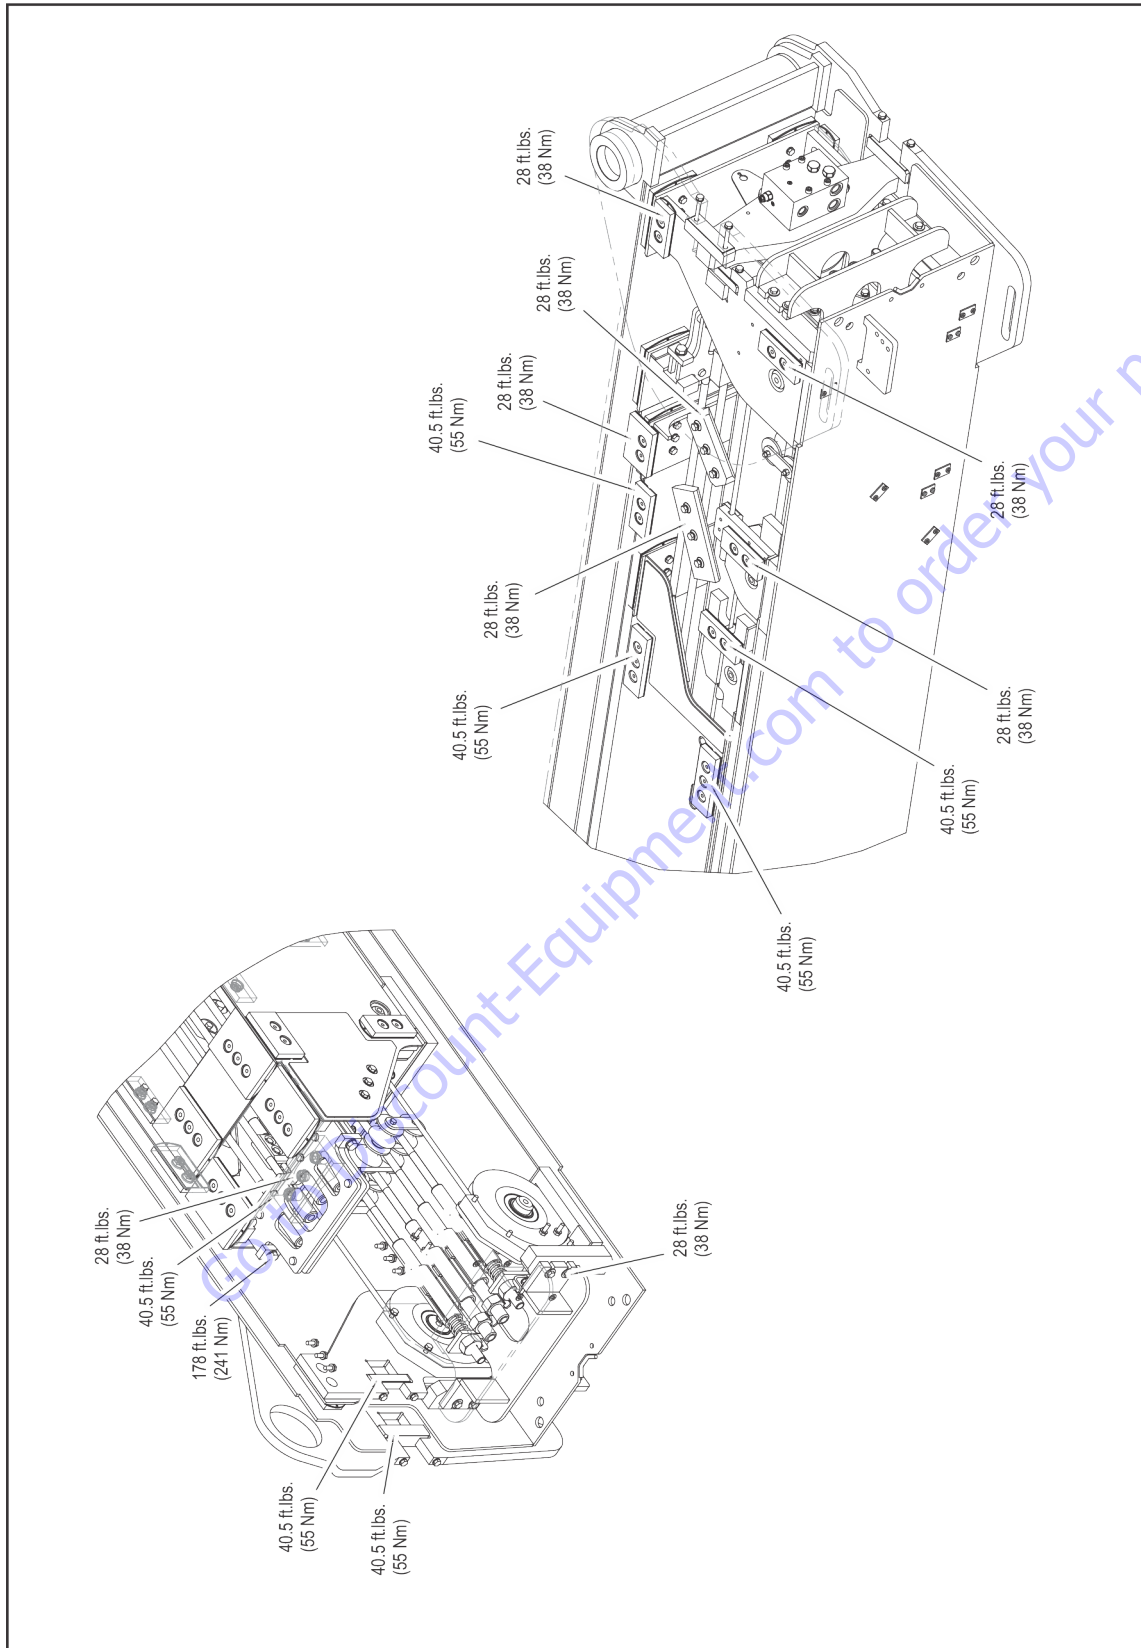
Boom Assembly Torque Values - Sheet 2 of 4
